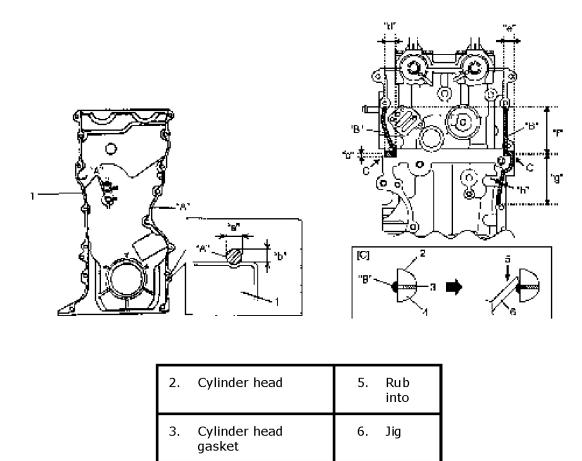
Identifying Timing Chain Cover Sealing Amount Courtesy of SUZUKI OF AMERICA CORP.
